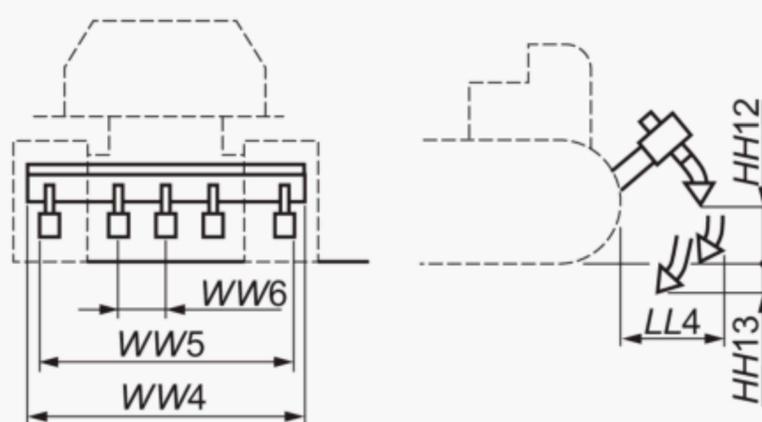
Dimensions of equipment and scarifier installed on loaders
